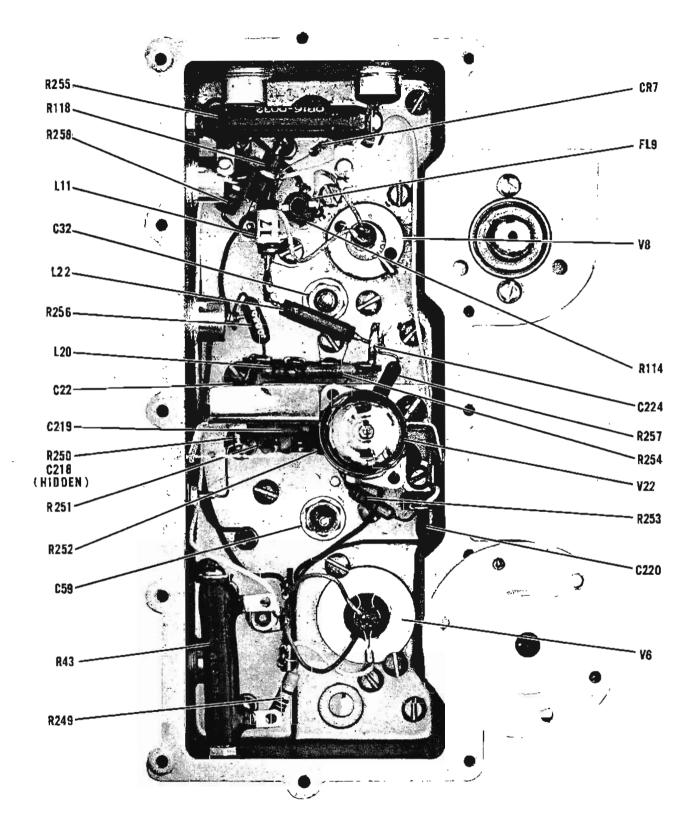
Model 608F RF Generator Assembly Showing Location of Unlabeled Parts (Top Cover Removed)
